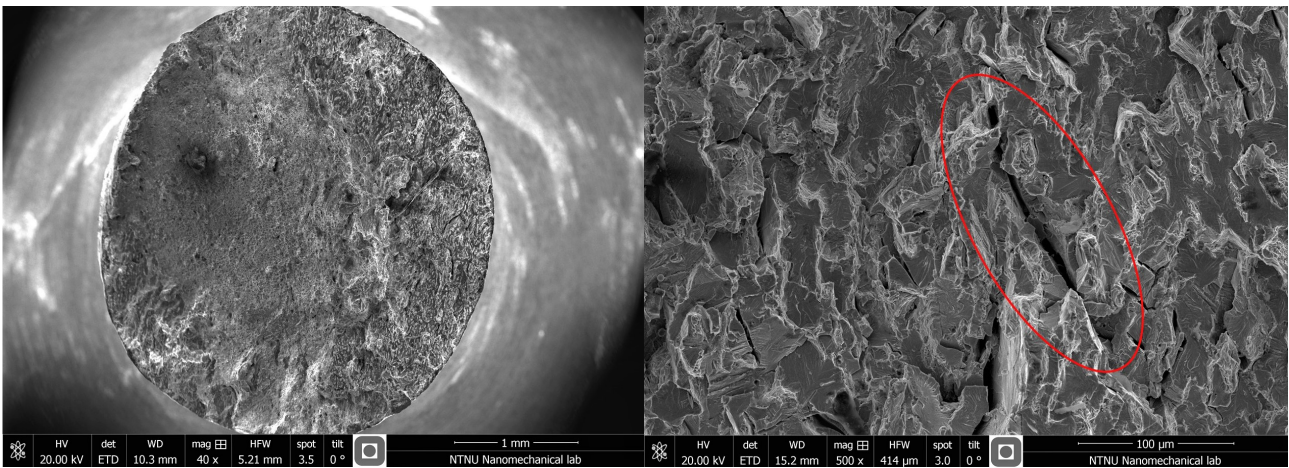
Images showing the fracture surface of polarised specimen 1 for material A.
